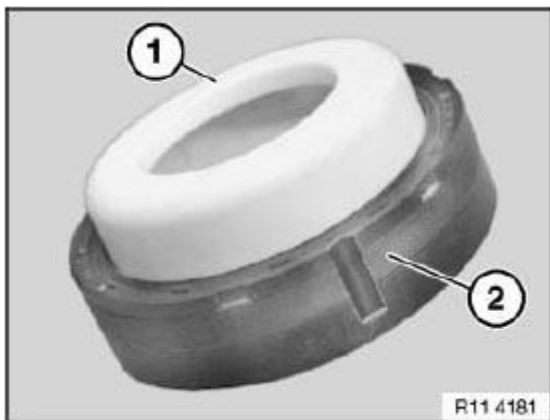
Identifying Crankshaft Seal And Support Sleeve
